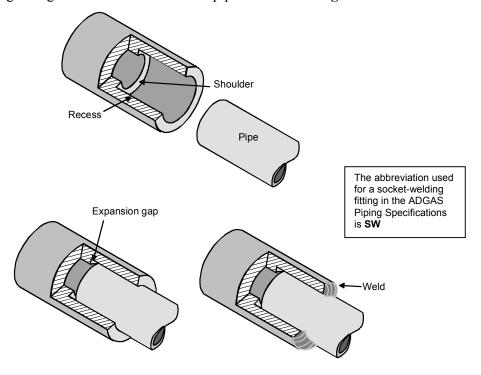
Socket-welding Joint (Part-section)
